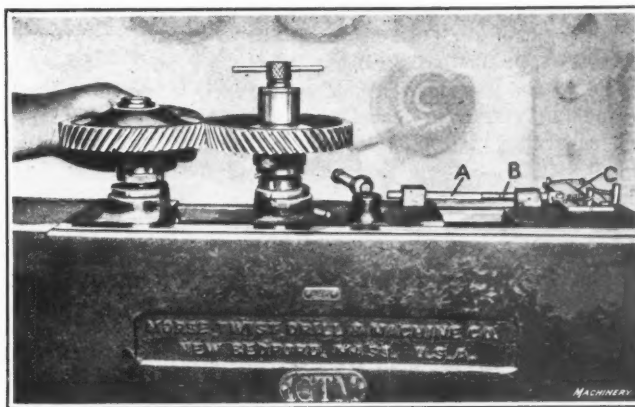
Standard Fixture for testing Concentricity and Center Distances of Spur Gears
